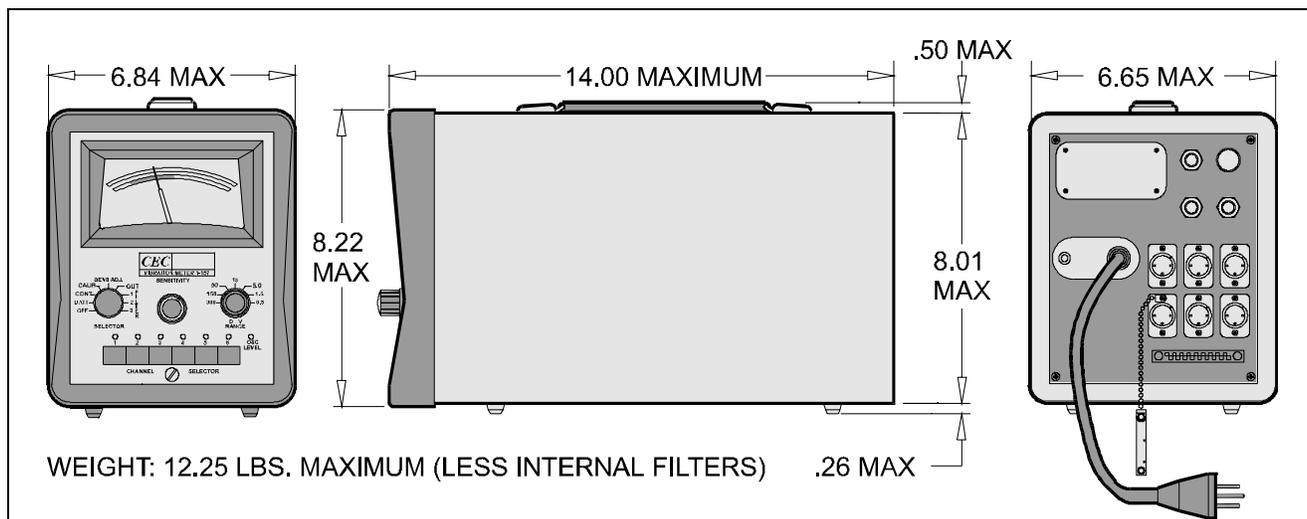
Vibration Meter Type 1-157, Dimensional Outline
